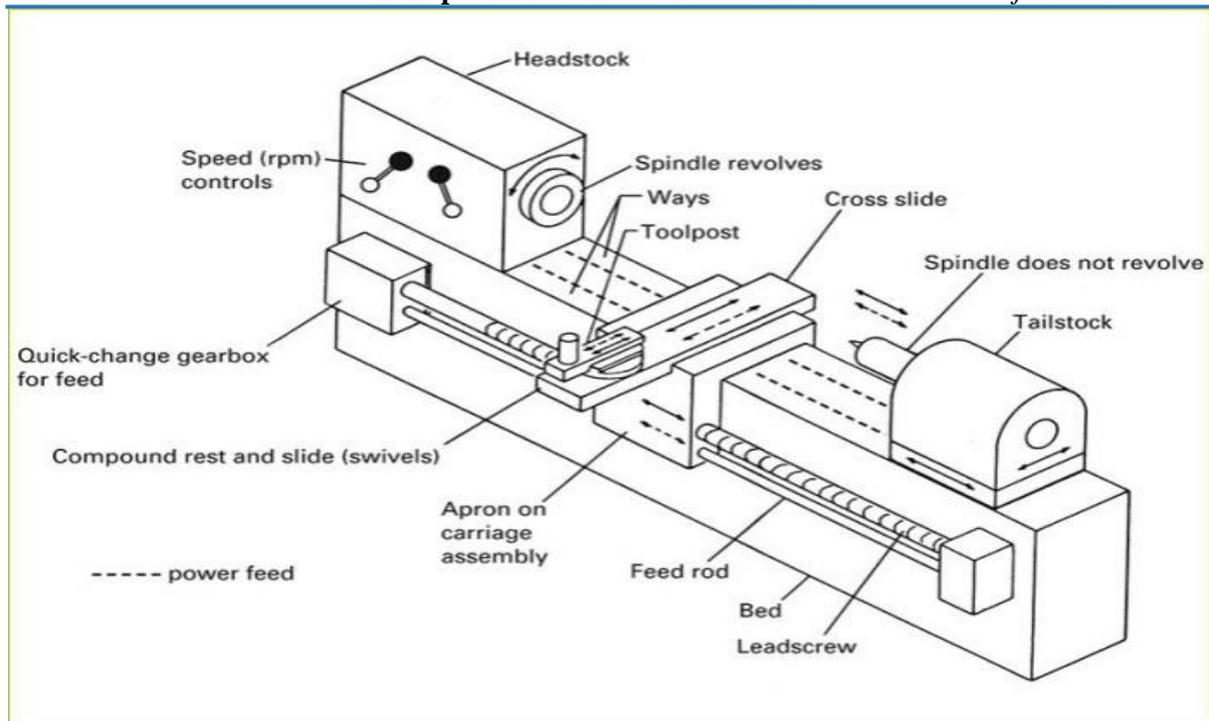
The principal parts of the engine lathe and movements that can be performed on it (Tuleun & Guma, 2006)
